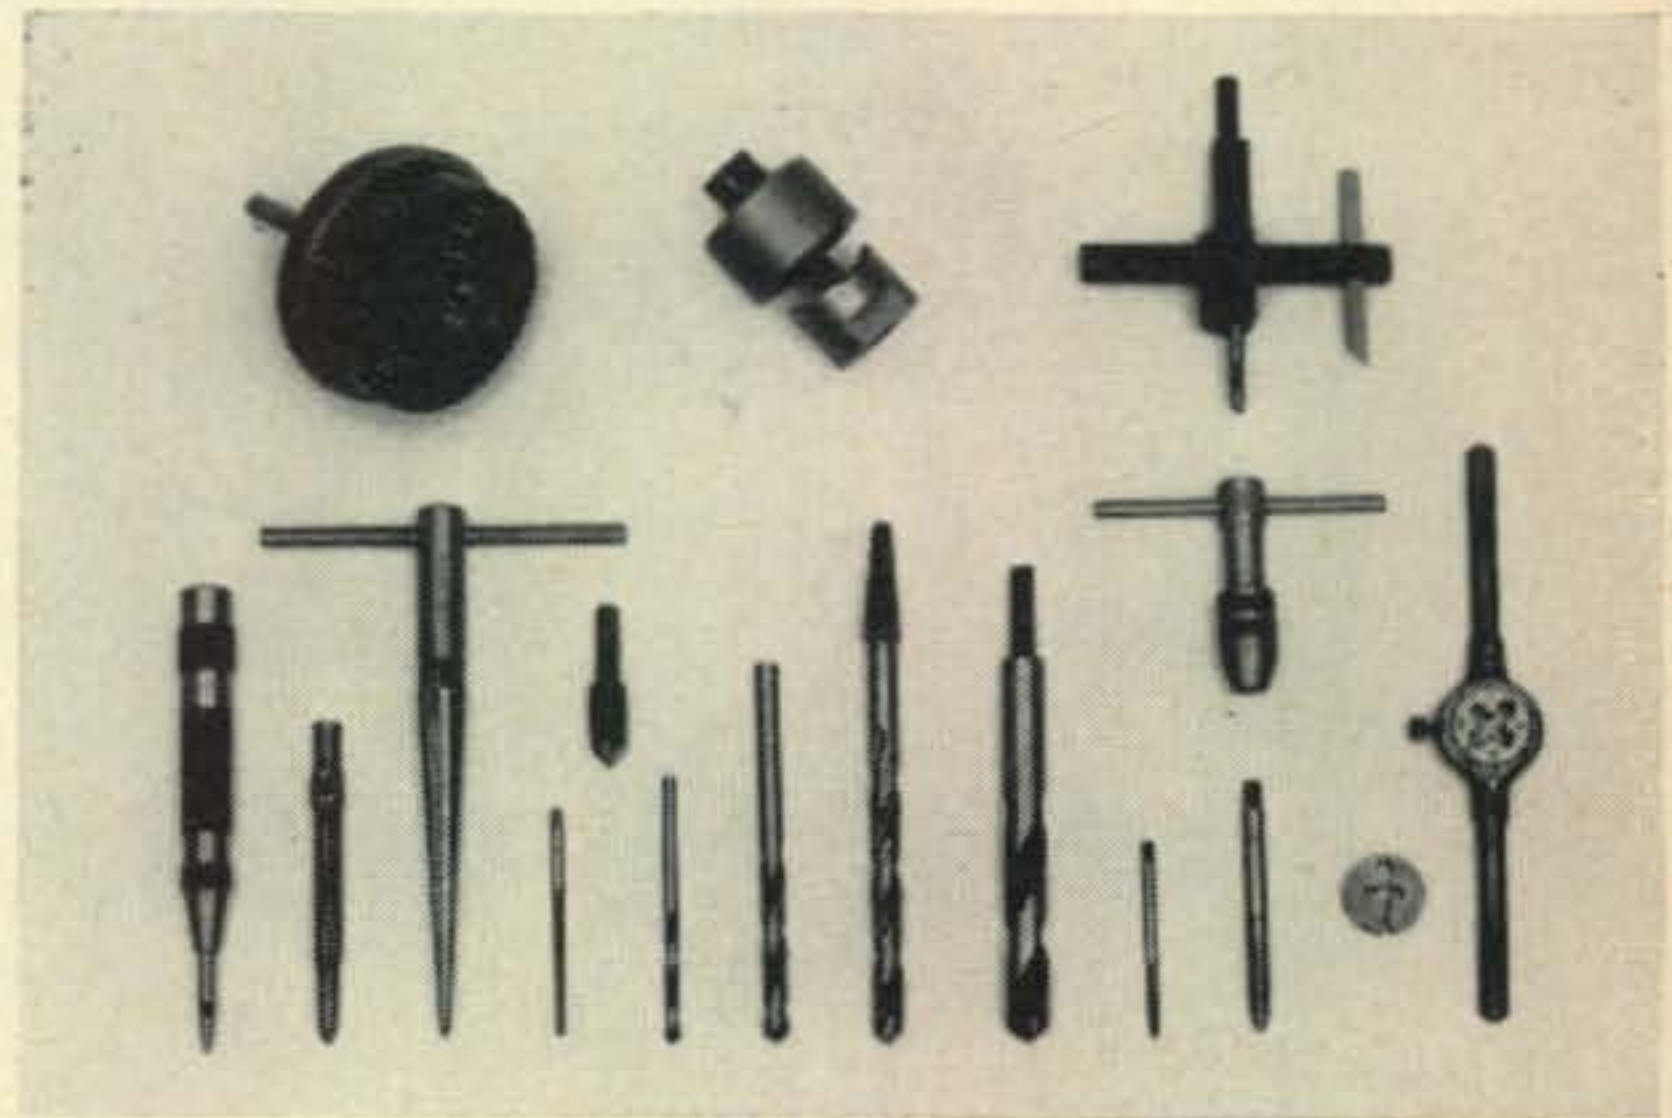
Top, left to right: hole saw, chassis knockout punch, fly cutter. Bottom row: Automatic spring-loaded center punch, manual center punch, tapered reamer, taper-pin reamer, above and to the right of which is a countersink. Four different twist drills are shown next, the first two having straight shanks, the third having a square shank and the fourth having a shank turned down to 1/4". Two different size taps are next with a tap wrench above them. At the right is a die-stock (wrench) and an extra die.
